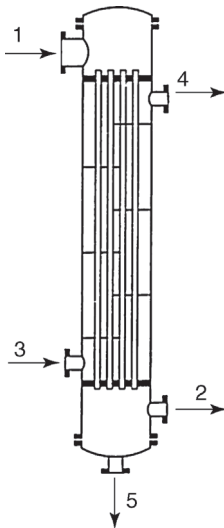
Surface condenser with fixed tube bundle. Condensation inside the tubes and cooling water around the tubes. 1: vapor inlet; 2: residual gas outlet; 3: coolant inlet; 4: coolant outlet; 5: condensate discharge.
